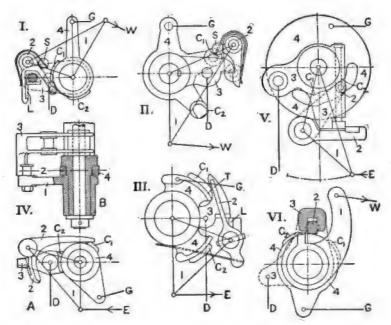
Various Releasing-gears: I. Murray-Corliss; II. Fishkill; III. Brown; IV. Lane & Bodley; V. Harris; VI. Robinson.
